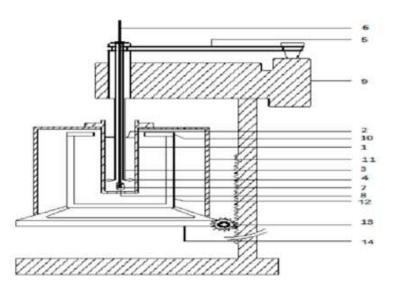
Diagram of Plunger Technique Apparatus for Making Composites (SiC particle incorporated in Aluminium-Mg melt)
